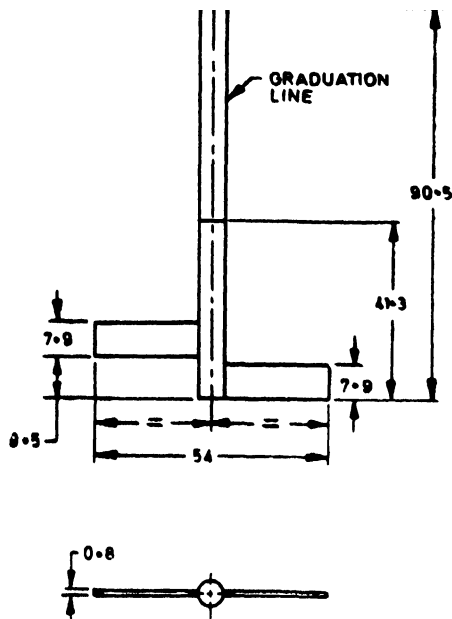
STORMER VISCOMETER WITH PADDLE TYPE ROTOR AND STROBOSCOPE TIMER
